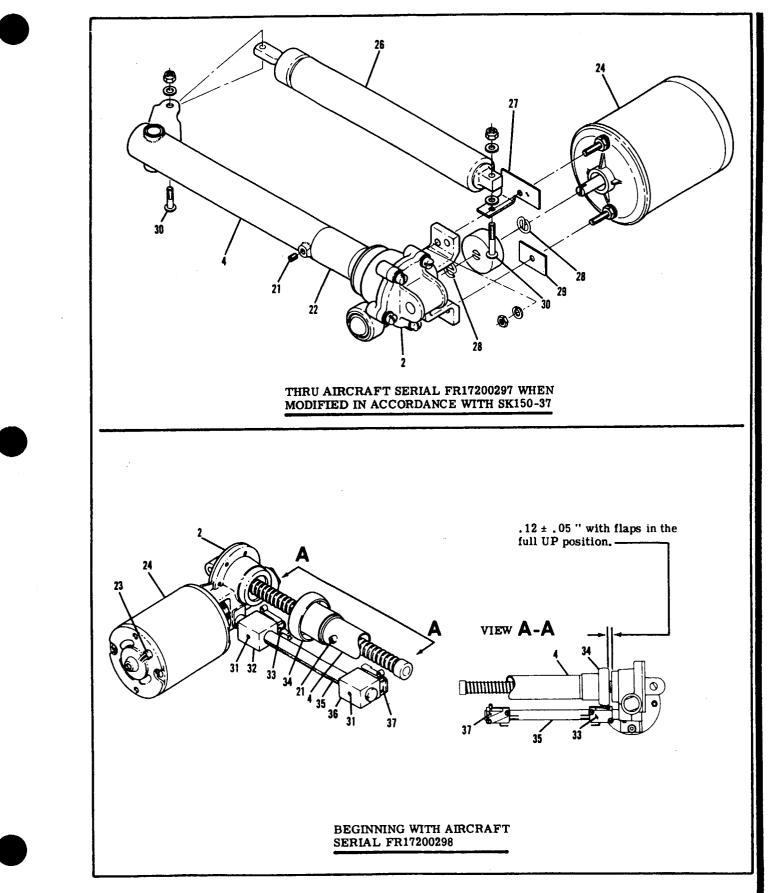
Flap Motor and Transmission Assembly (Sheet 2 of 3)
